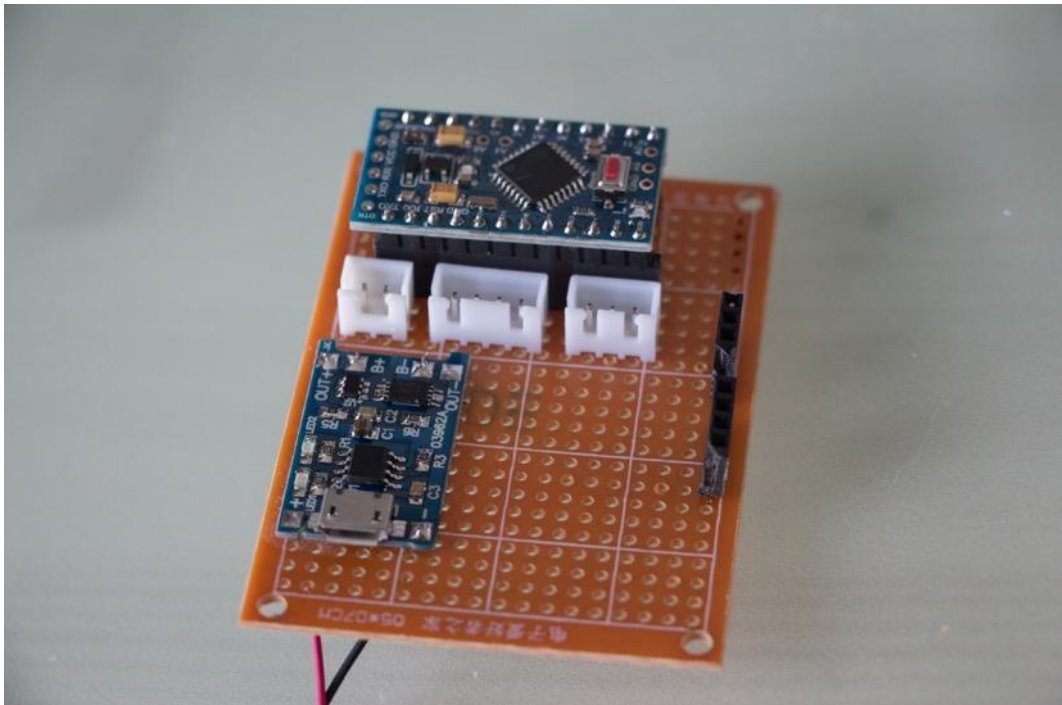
15 PCB Solar Power Balancer Mounted Bottom View (own illustration)
